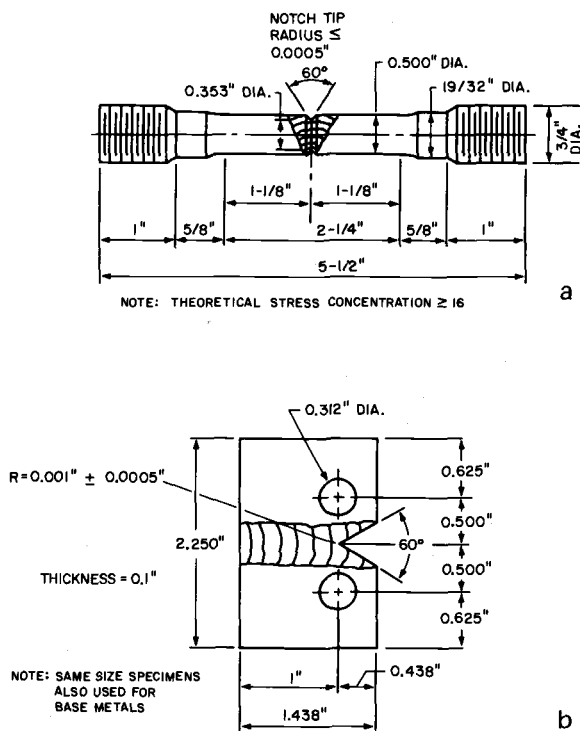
(a) Notch tension specimen, and (b) tear test specimen.
